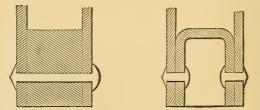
Solid Mud Ring. Fig. 12. Flanged Mud Ring.
